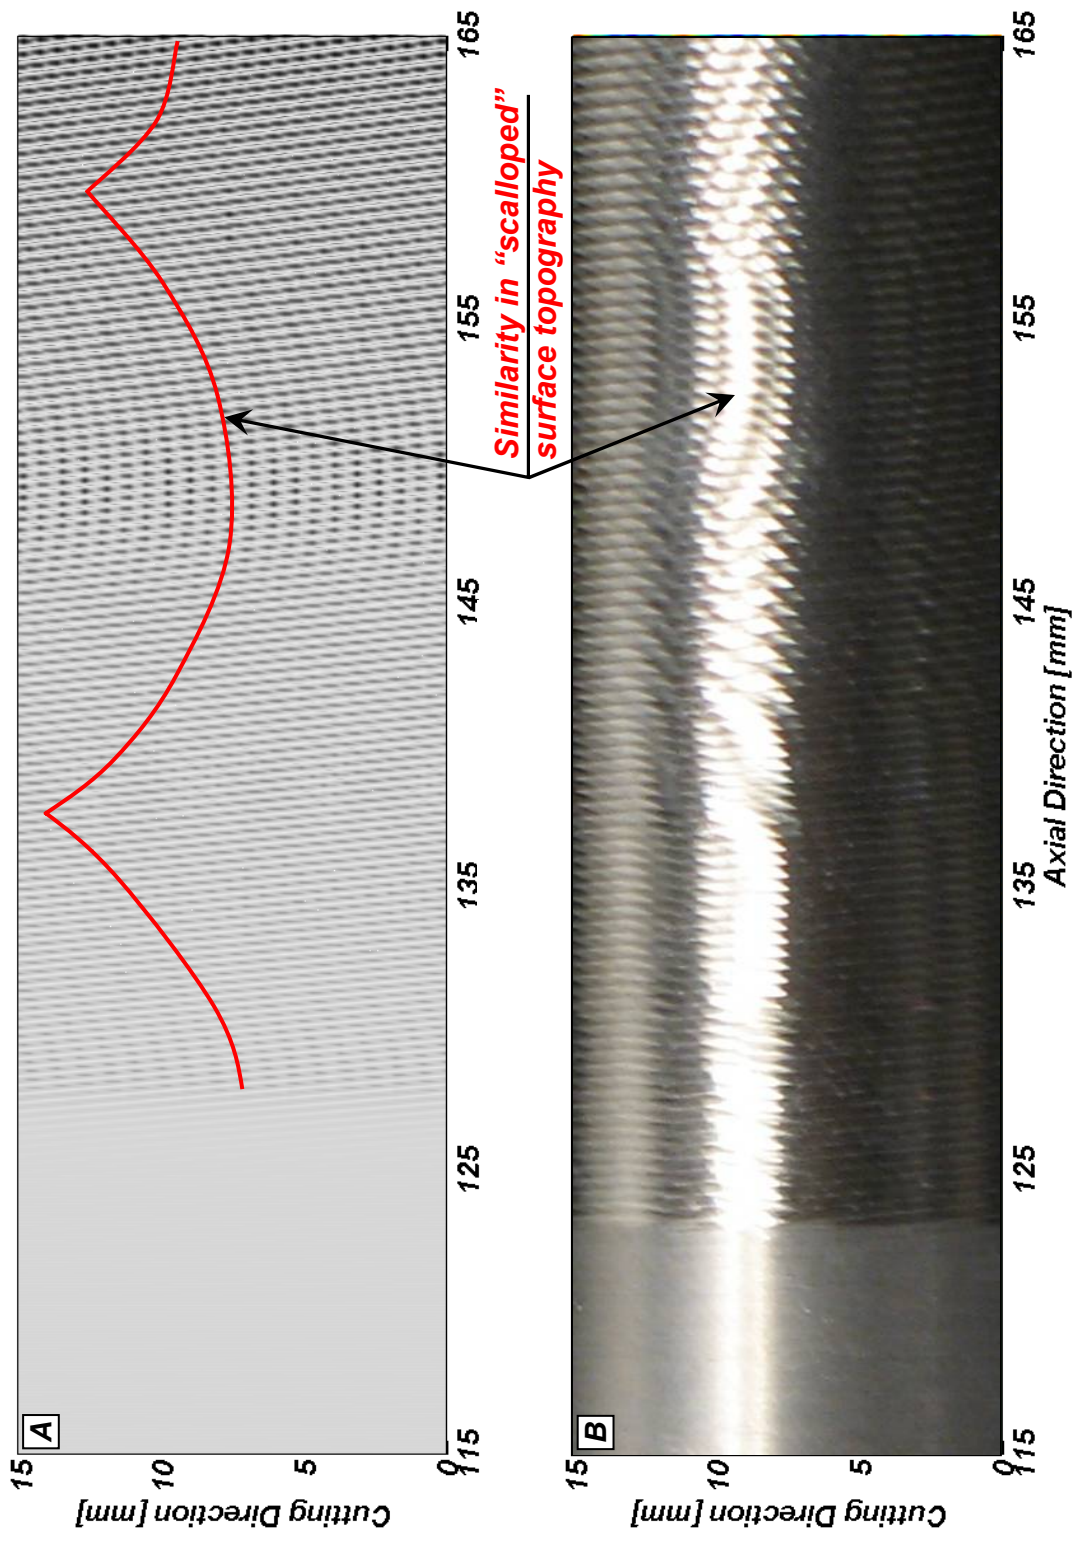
Workpiece surfaces generated during unstable cutting showing chatter marks. (A) Simulation; (B) picture of the actual machined workpiece surface.
